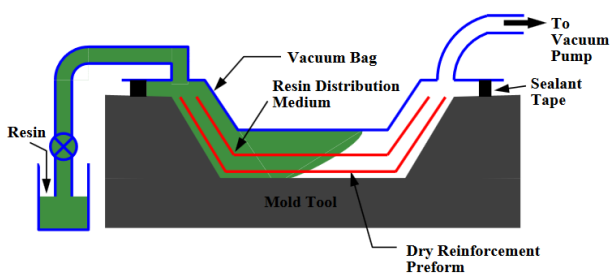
Vacuum Added Resin Transfer Molding (VARTM) process schema [2]
